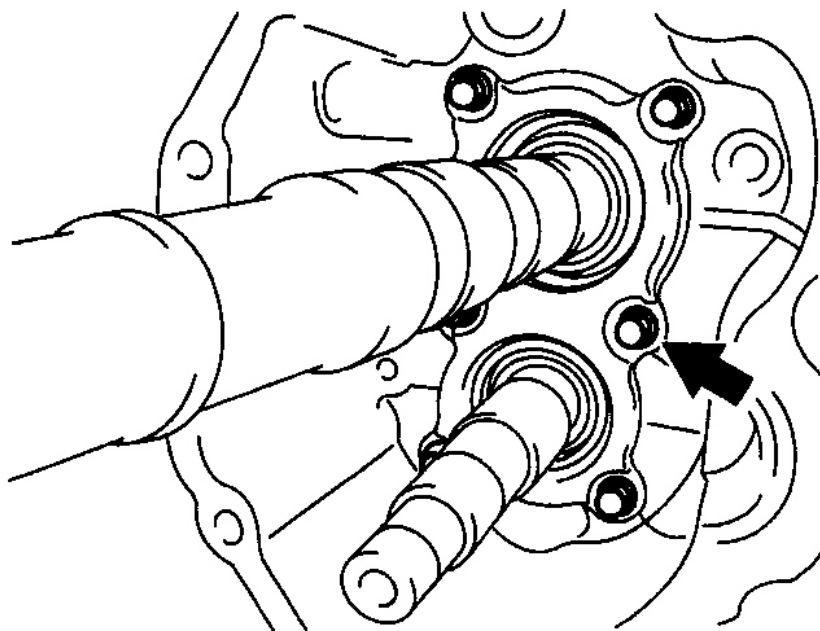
Installing Maindrive Gear Bearing Race & Mainshaft Center Bearing Race
